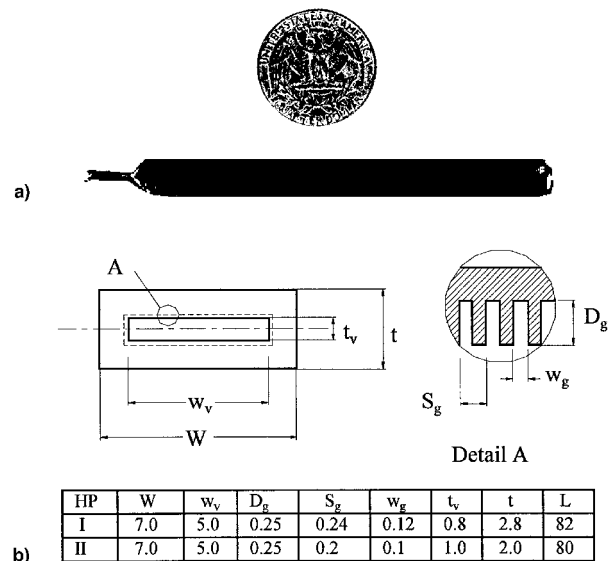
Samples of miniature heat pipes: a) overall dimensions and b) cross section dimensions in millimeters.
